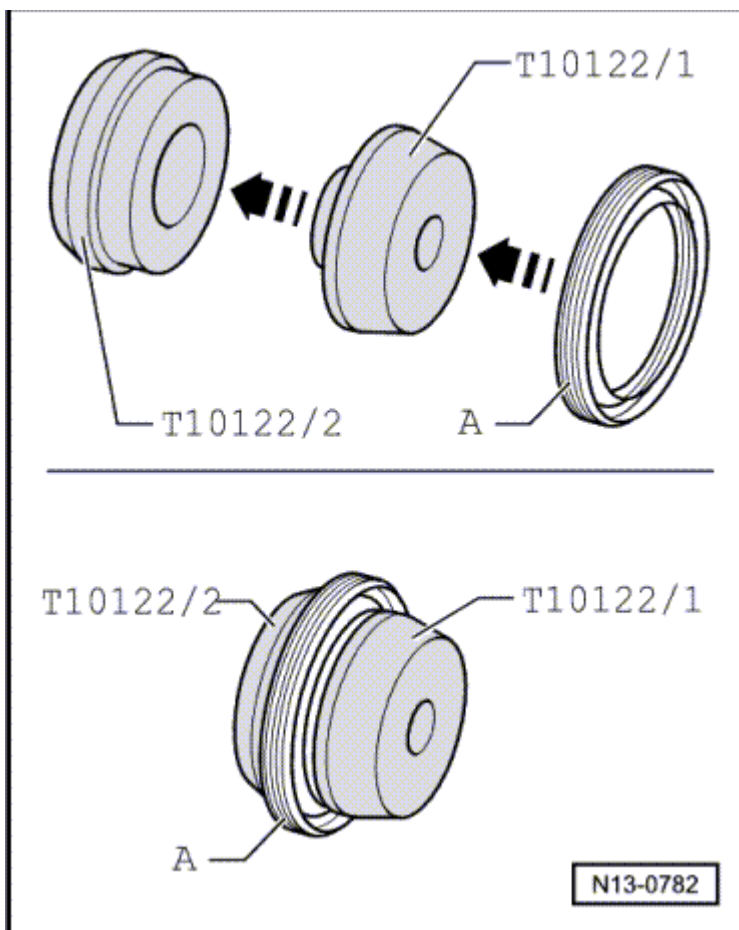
Identifying Seal, Sleeve T10122/1 And Assembly Tool T10122/2
